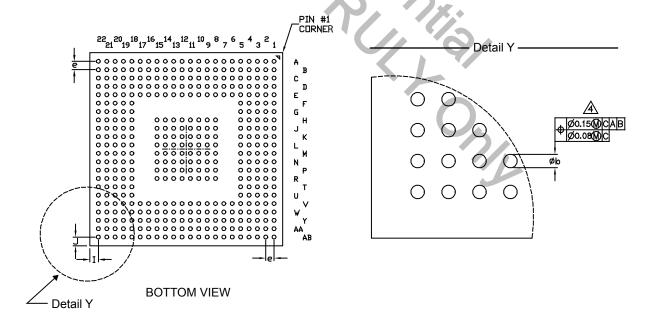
Bottom View of the A12A55 Package (left) with Detail Y (right).
